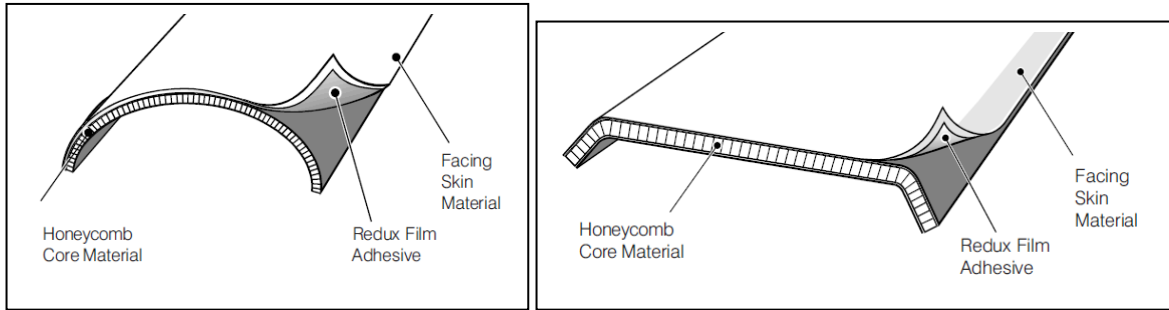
Shaped honeycomb core sandwich panel [28]
